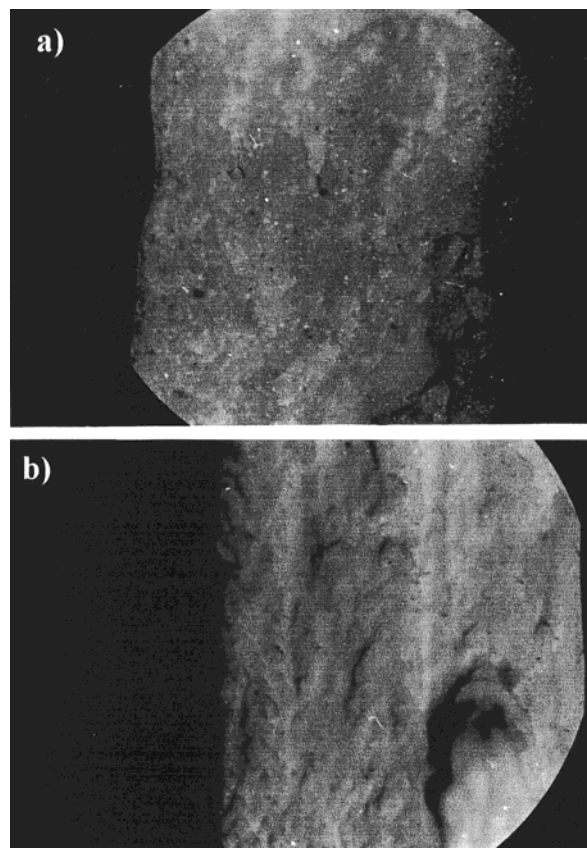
Optical microscopy of impact fracture surfaces for (a) a brittle sample and (b) a ductile sample.
